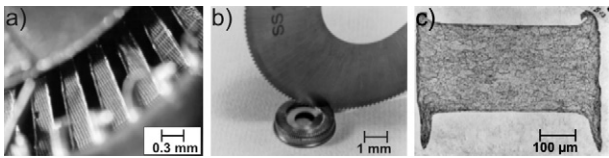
(a) Shaving head, (b) sawing process, (c) burr formed (Source: Altena, H.; Philips Netherlands, 2008).
